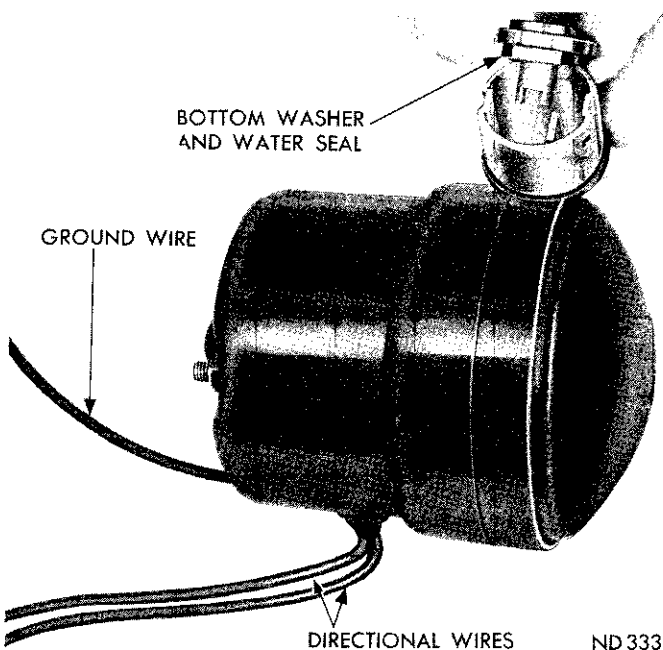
Removing Bottom Insulator and Water Seal Washer (Typical)
